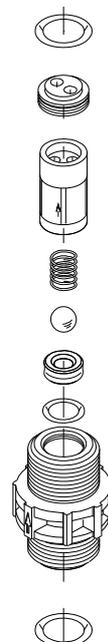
Stainless-steel or plastic DN 8 valve, spring-loaded as an option
